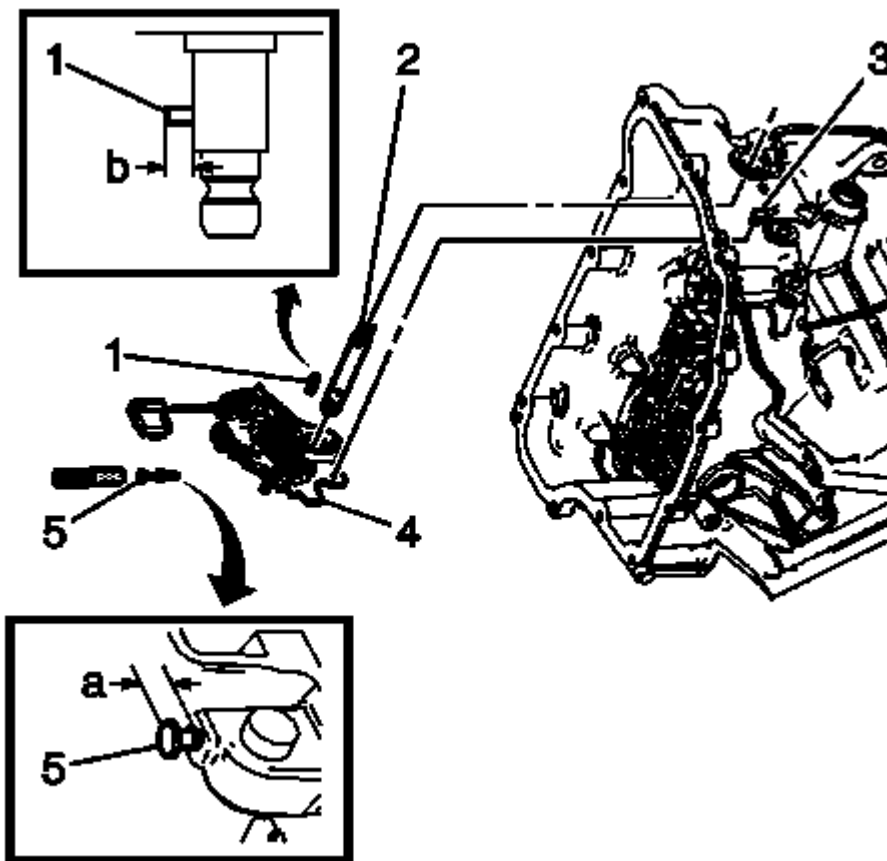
Identifying Manual Shaft Detent (W/Shift Position Switch) Lever Assembly
